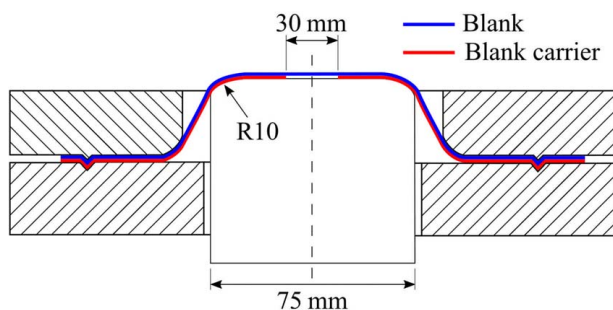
Schematic of the Marciniak punch with a deformed blank and blank carrier and important dimensions (not to scale)
